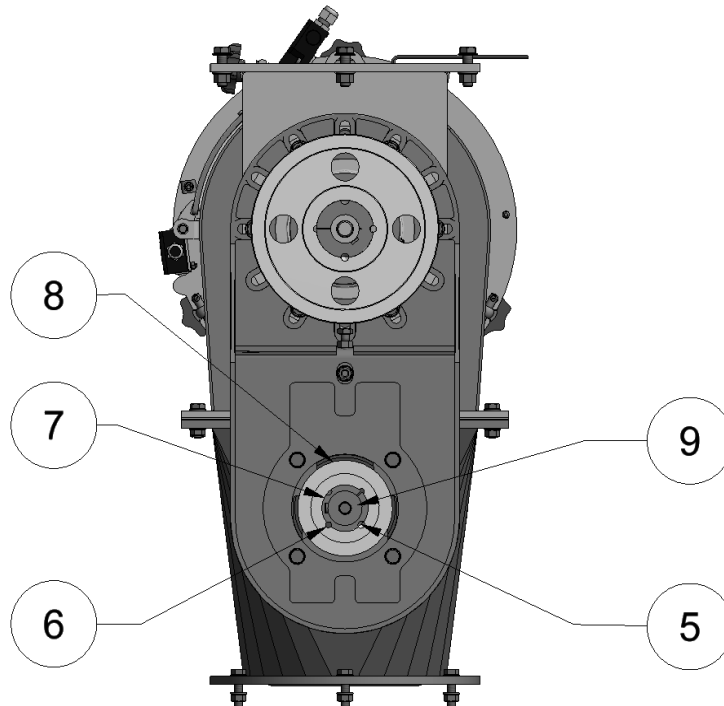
Bearing housing (drive side): Remove V-belt - drive without protective plate
